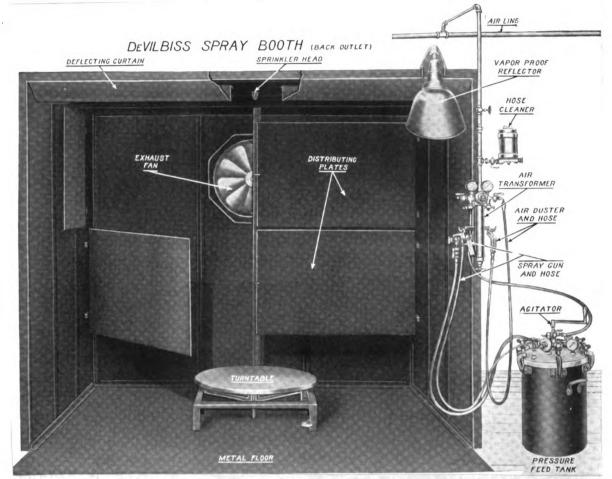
Detailed View of Small Spray Booth. Note location and protection of lighting fixture.
